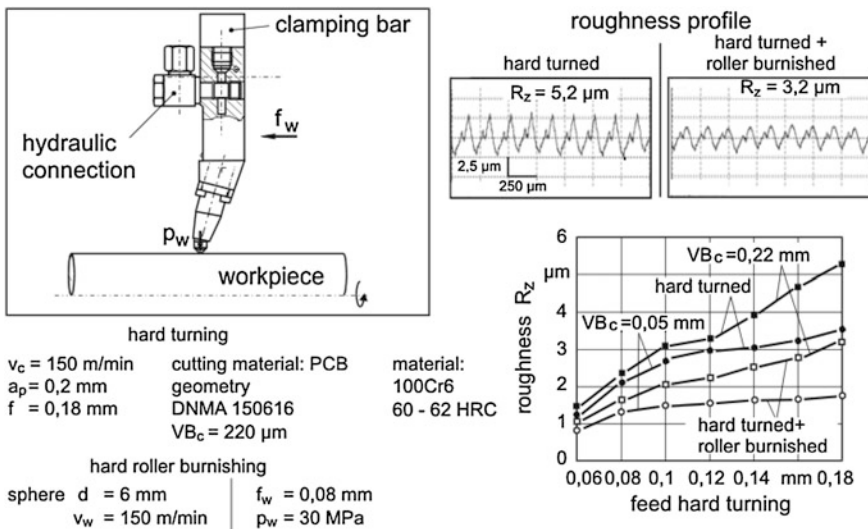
Surface quality after hard turning and hard roller burnishing
